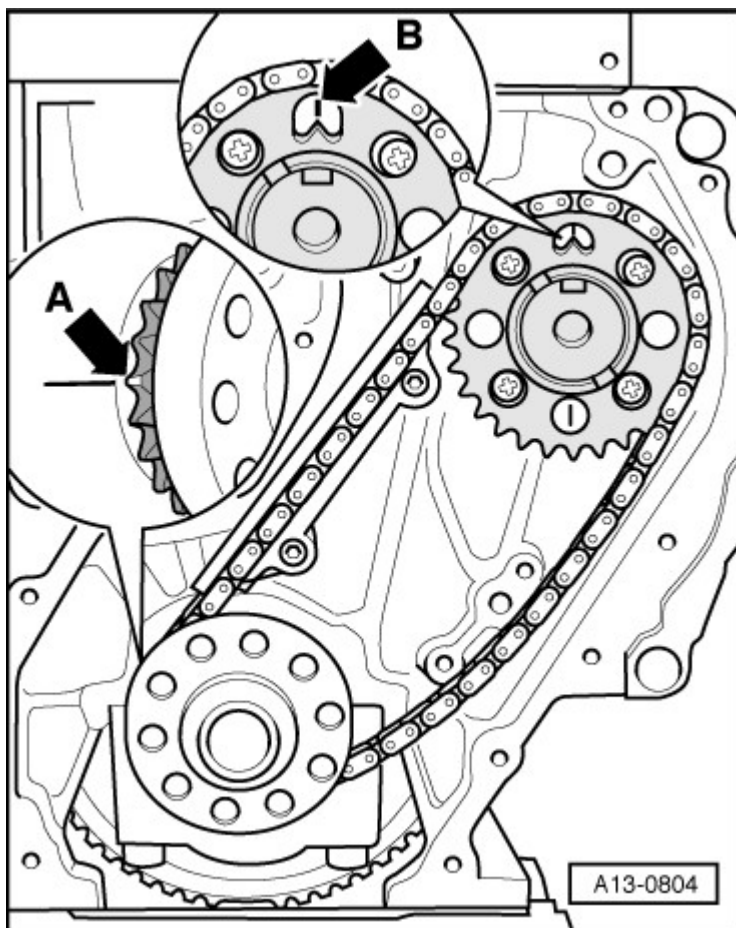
Identifying Large Sprocket Installed Into Timing Chain With Tab Aligned To Mark On Cylinder Block
